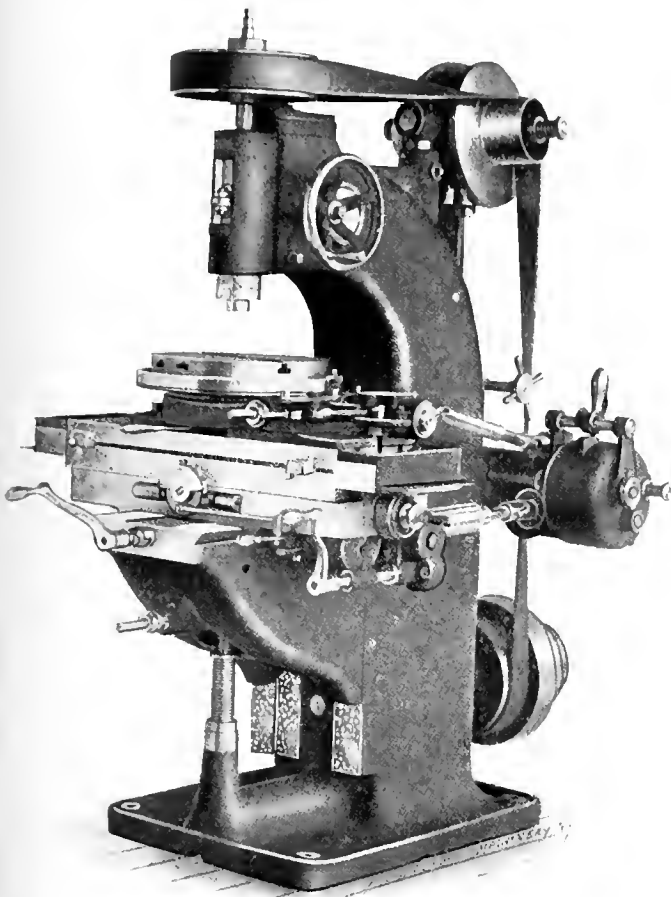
Becker Milling Machine with Improved Rotary Milling Attachment
